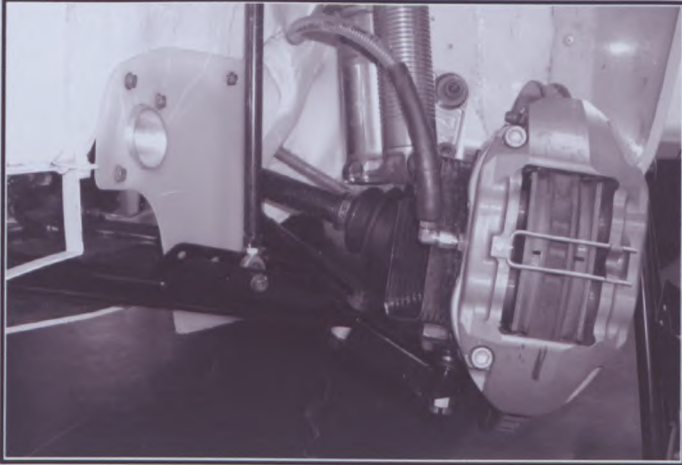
Fr. brake cooling duct inside wheel arch
